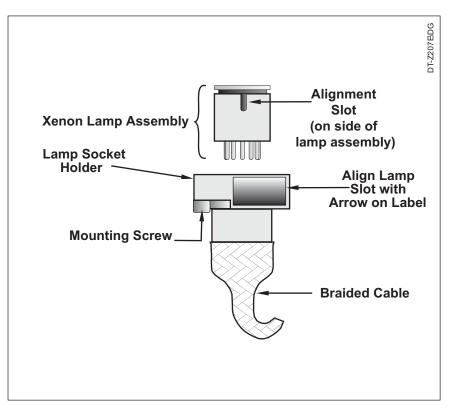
Side View of Xenon Lamp Assembly and Socket
